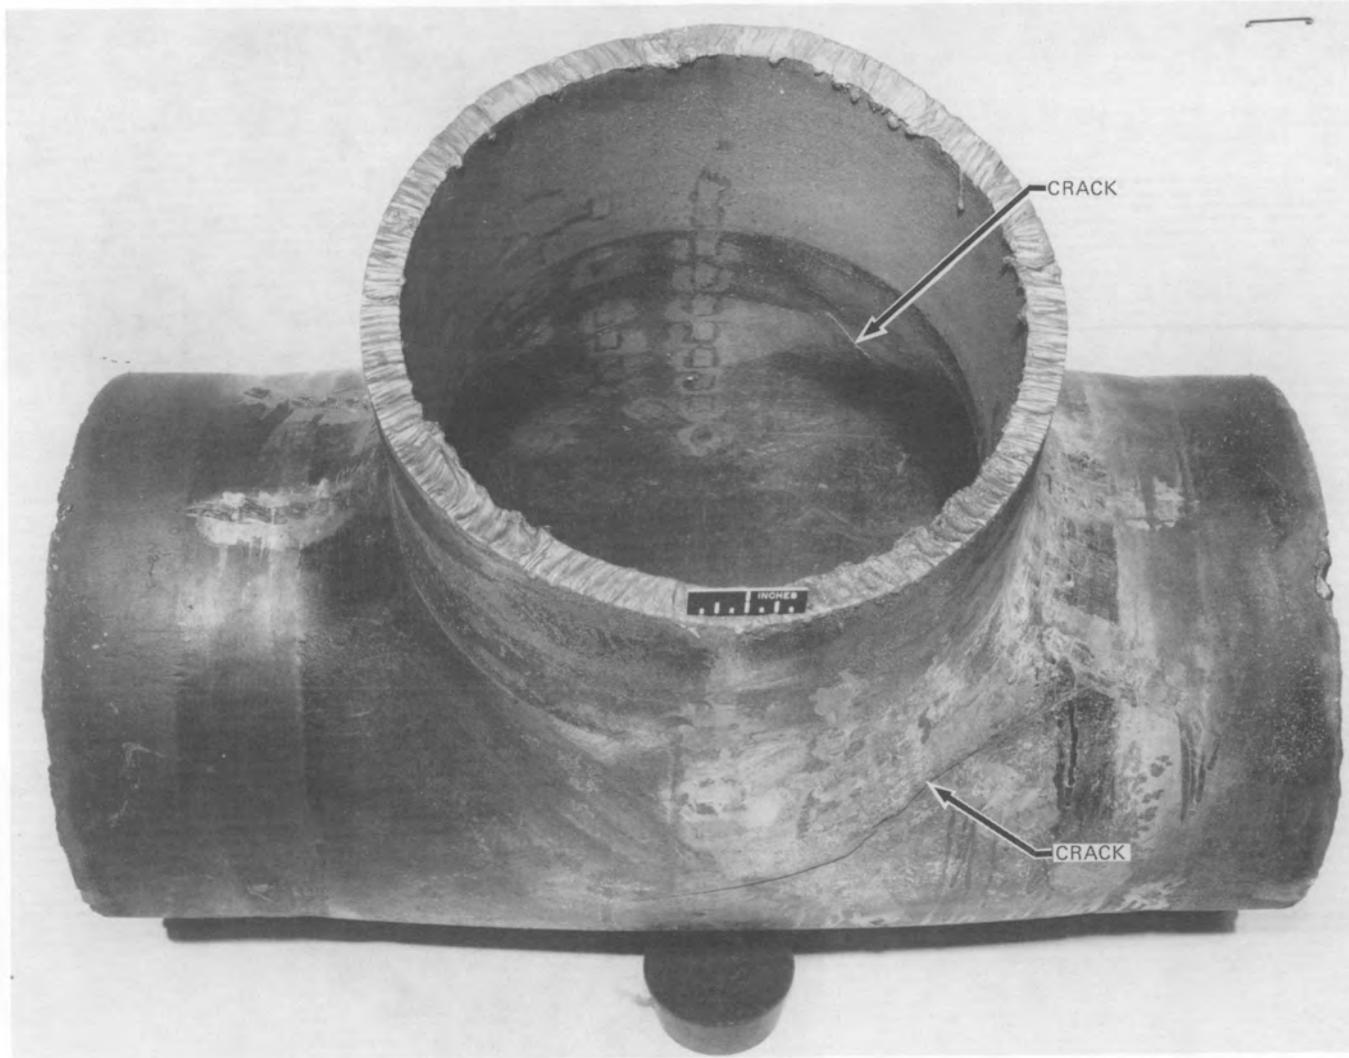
Fatigue cracks on inside and outside surfaces of T-6 after failure.
